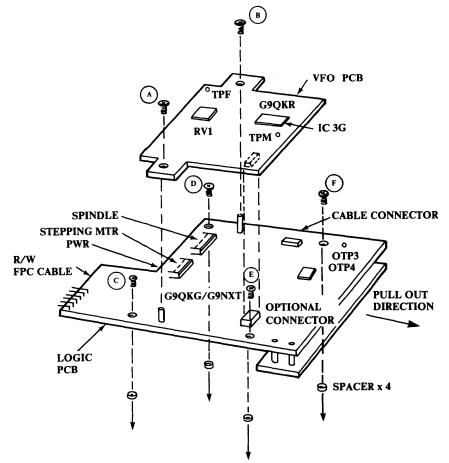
PCB Diassembly/Assembly (Disk Drive)
